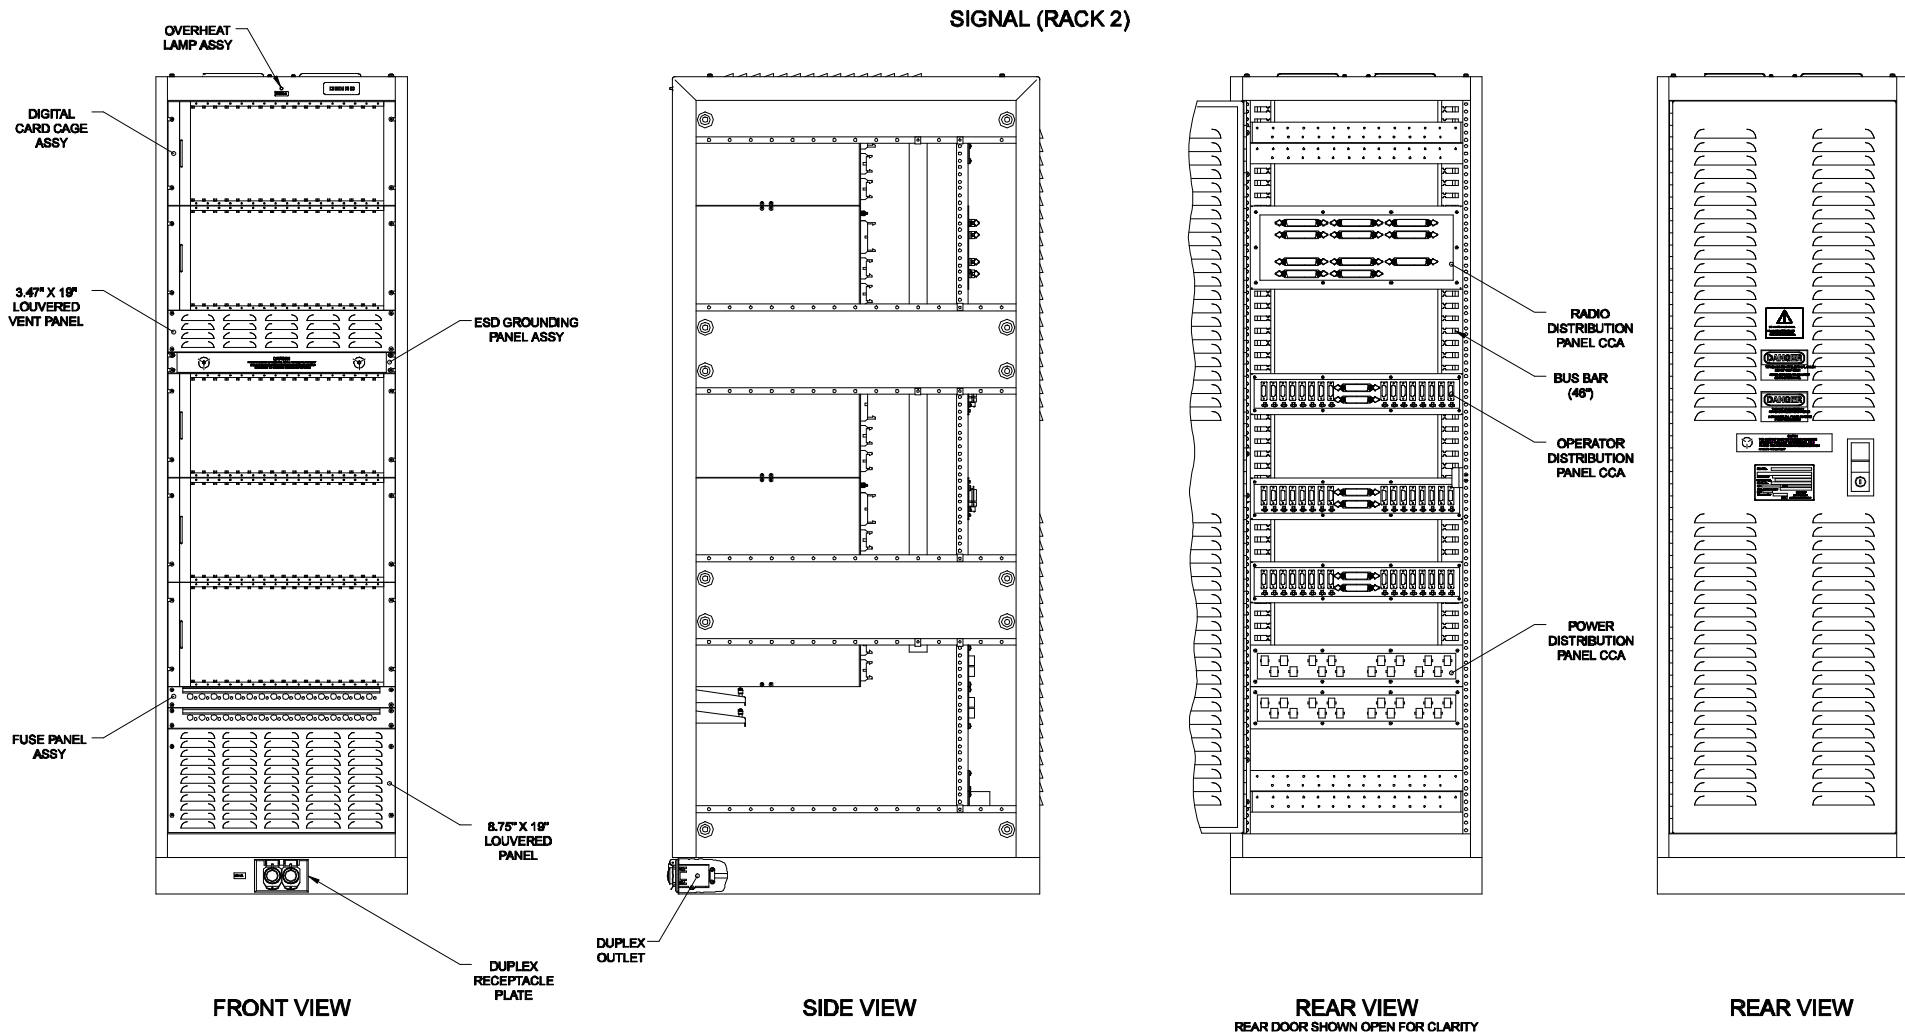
Basic ETVS System 4 (BS-4); Racks 1-7; Front, Side, and Rear Views (Sheet 2 of 7)
